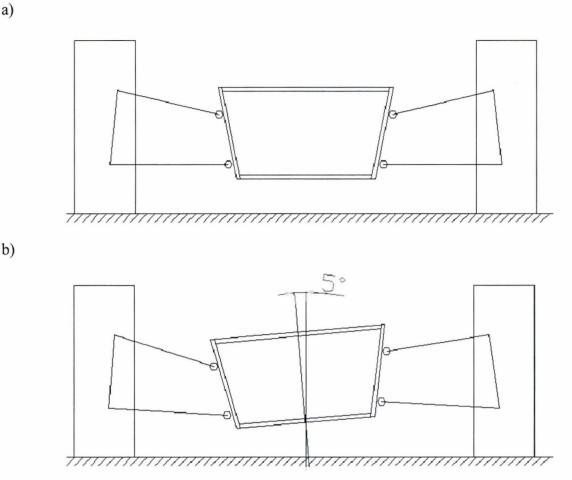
Chassis rotation a) straight ahead b) 5 degrees body roll
